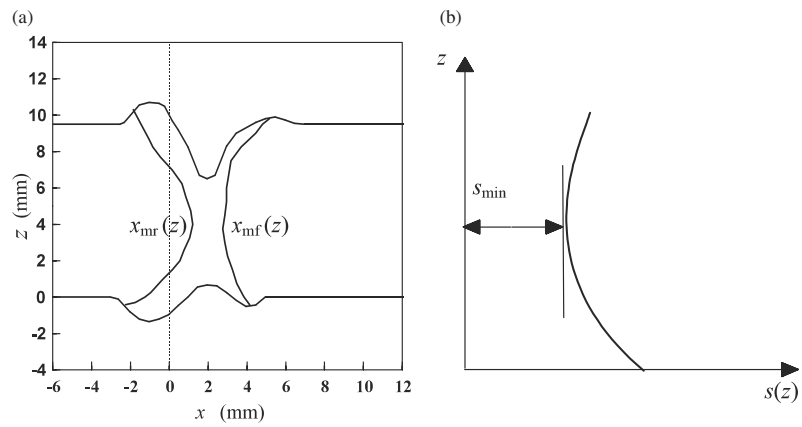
Definition of weld span: (a) weld front and rear profiles; (b) minimal span of weld.
